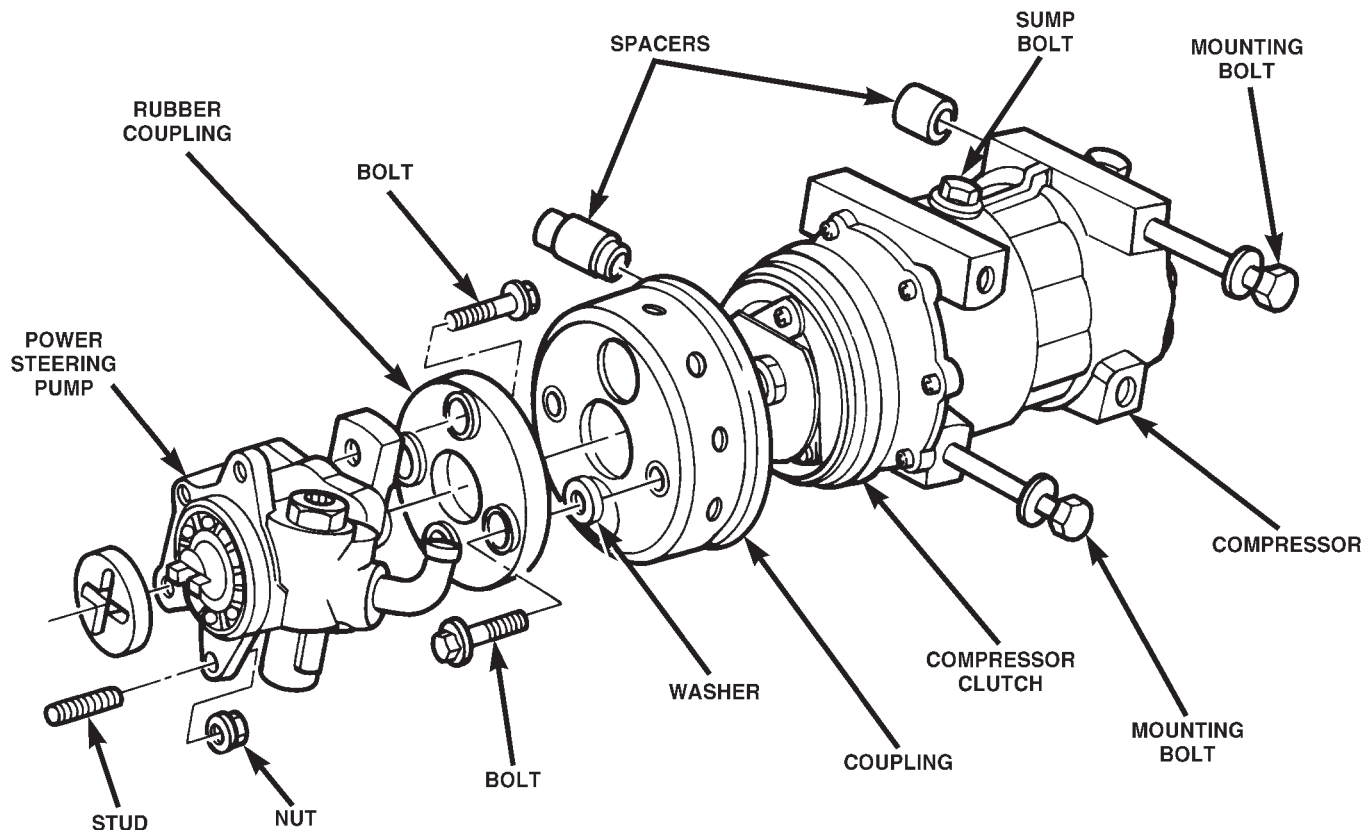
Compressor Components (2.5L Turbo Diesel)
